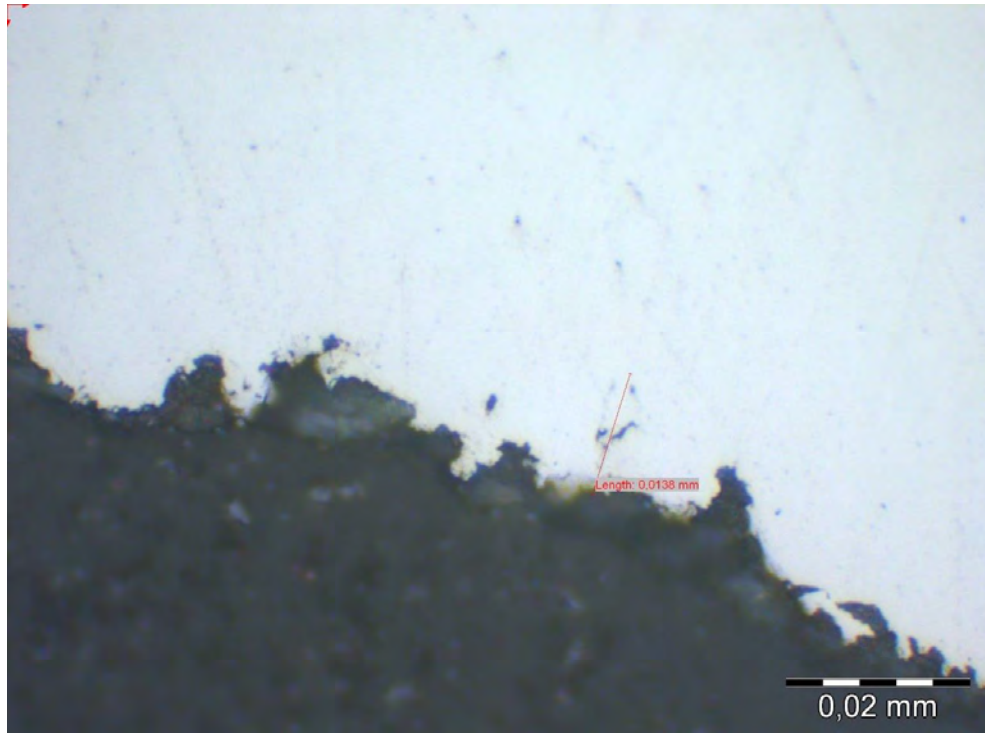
Cut one in crack at segment A, fourth ridge on barrel no. 14389
